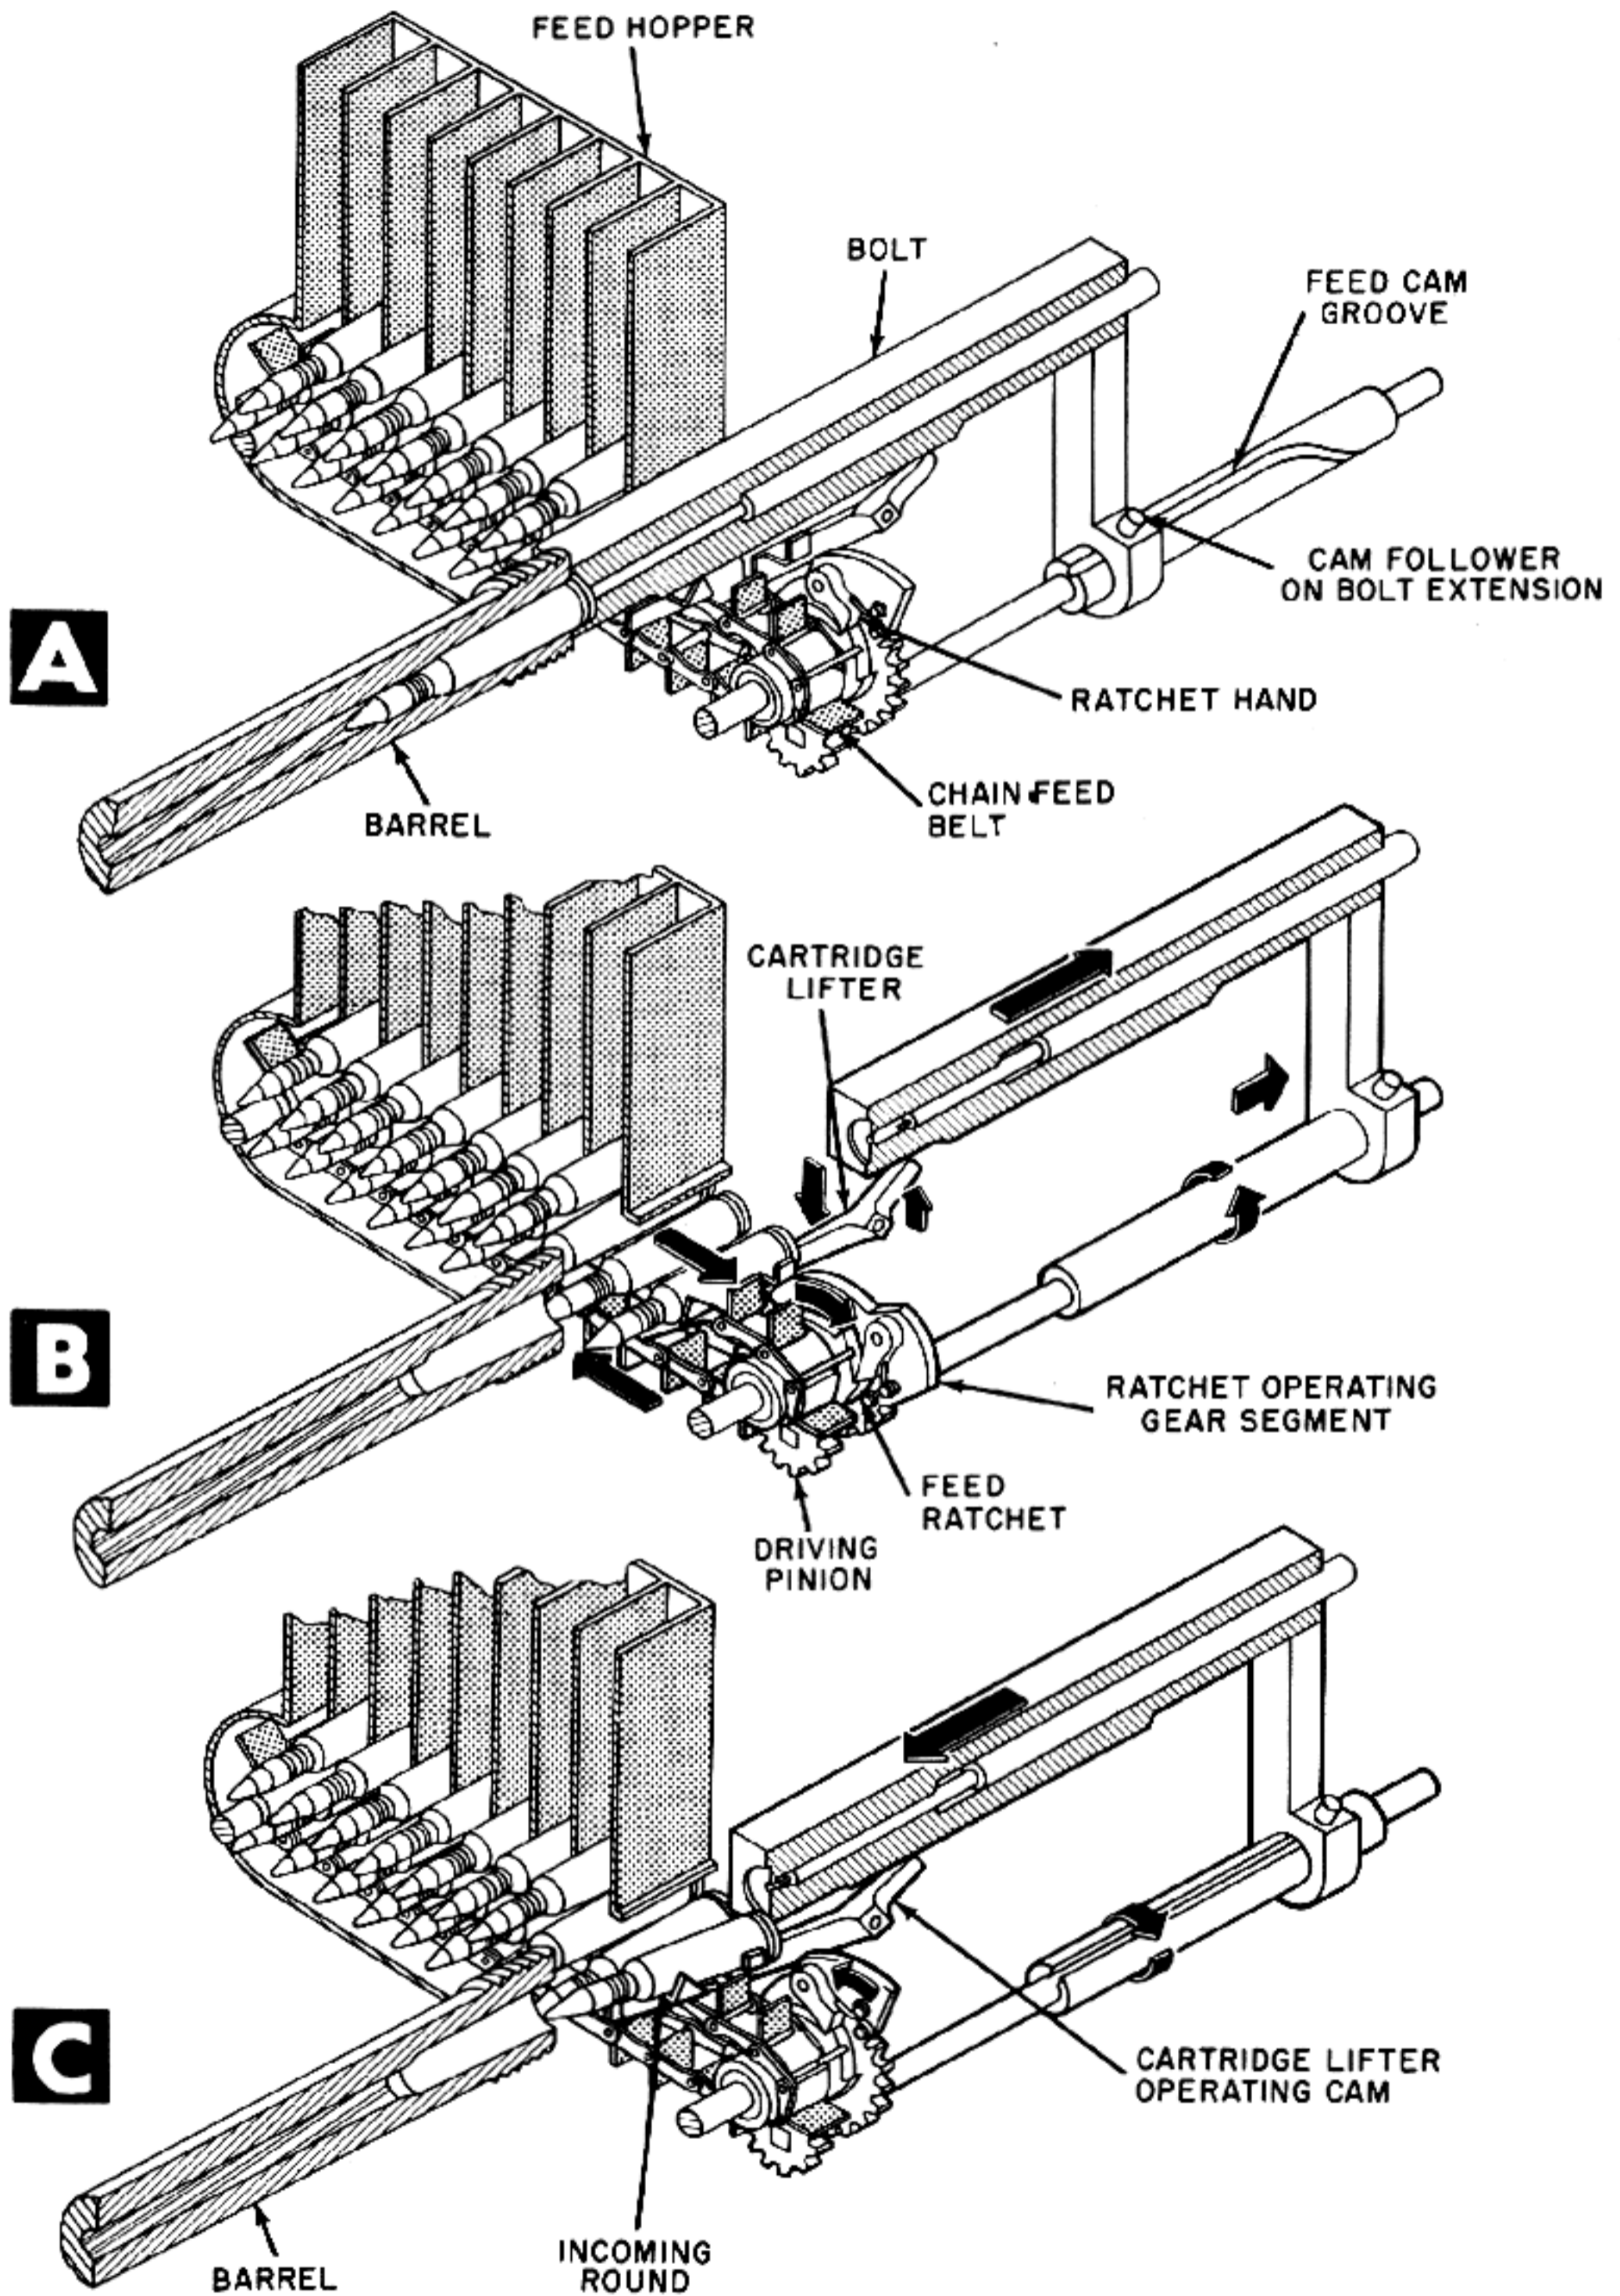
Recoiling Bolt Actuates Conveyor Pinions.
